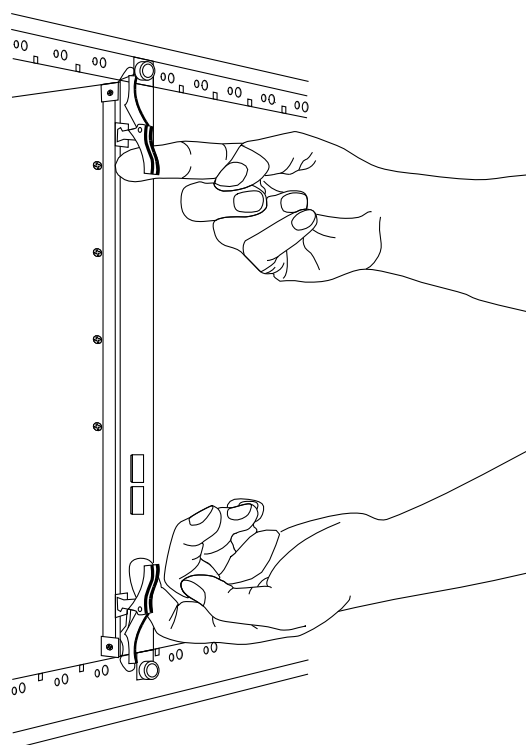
ATCA Front Board Handles - First Step to Remove a Board
